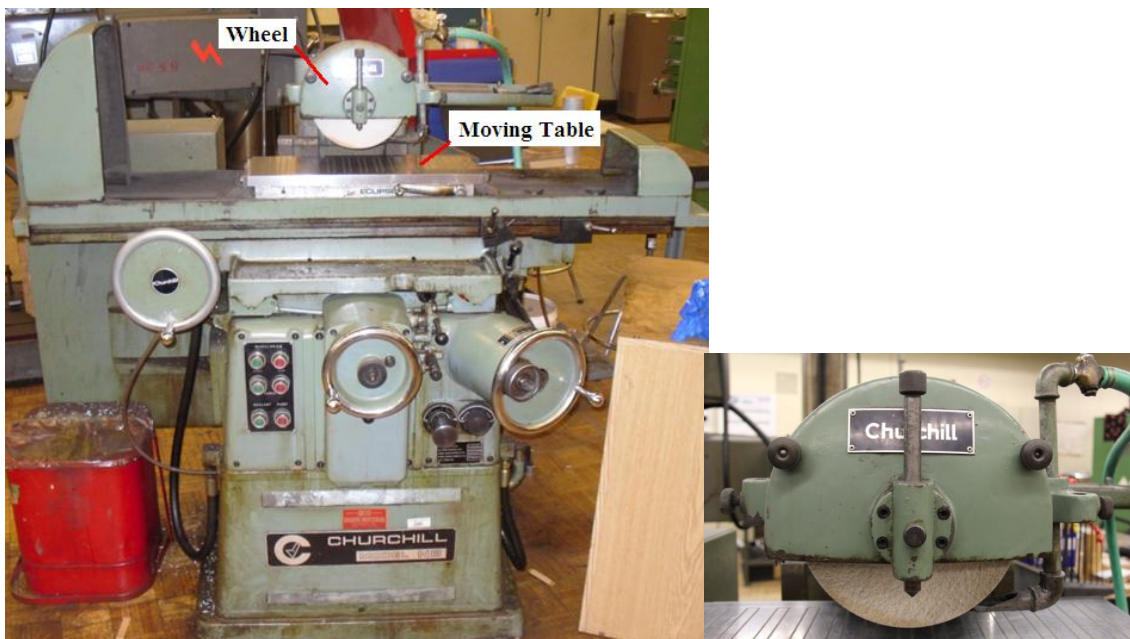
Churchill Model NB Surface Grinder (Left) and Grinding Head with Wheel (Right)
